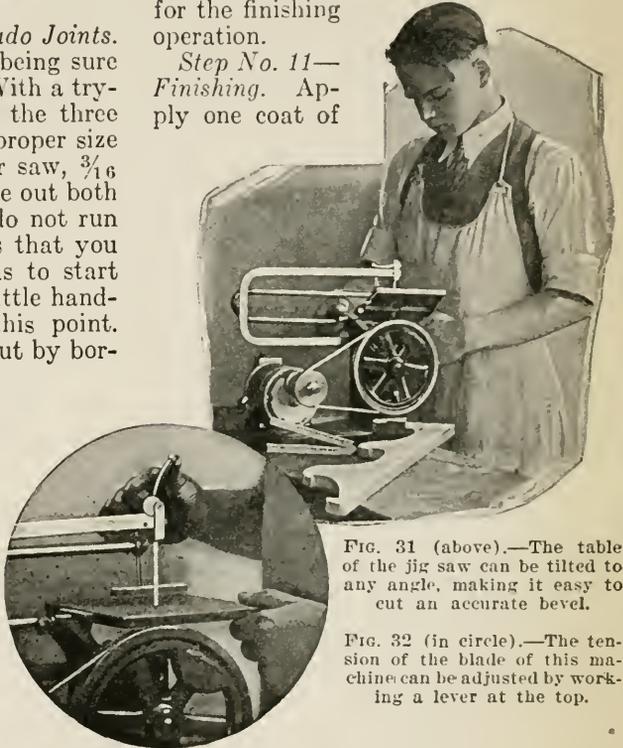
(above).—The table of the jig saw can be tilted to any angle, making it easy to cut an accurate bevel.
